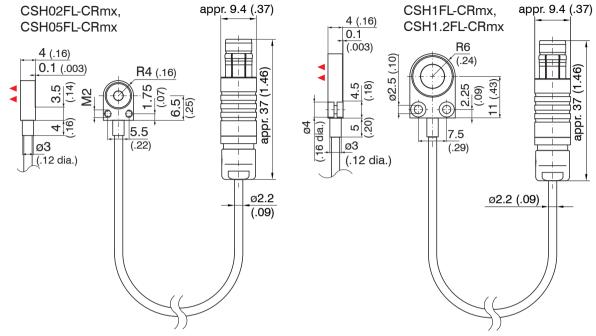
Flat sensors with integrated cable, measuring range up to 1.2 mm nominal
